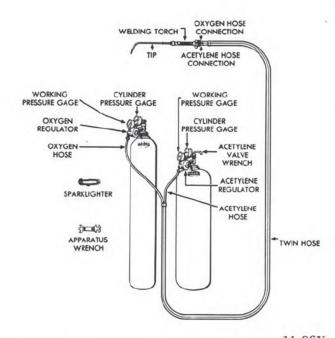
Portable oxyacetylene welding outfit.
